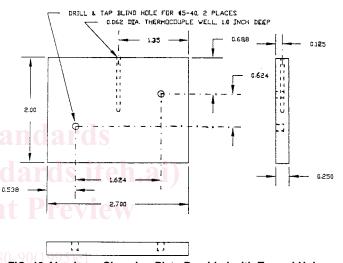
Aluminum Clamping Plate Provided with Tapped Holes for the Pressure Block and a Thermocouple Well
